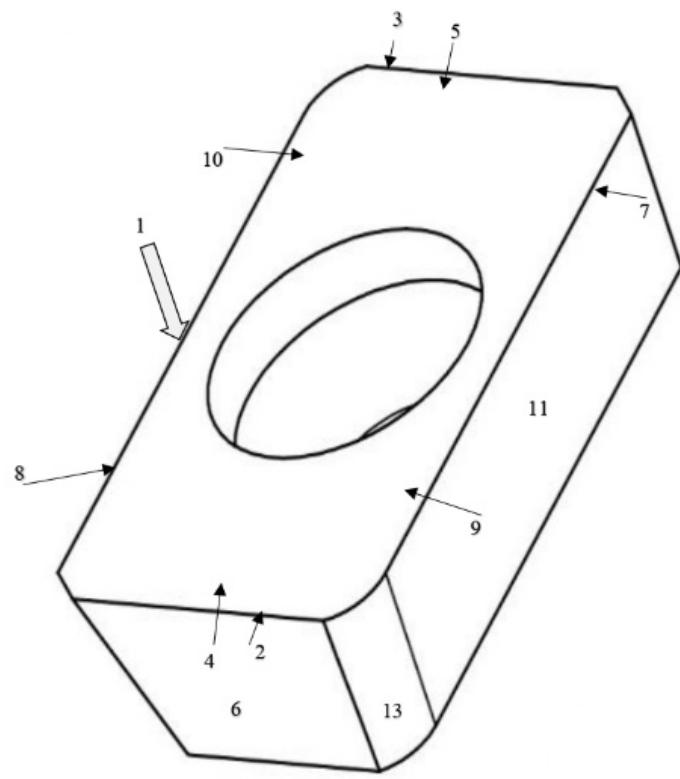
Perspective view of stainless steel 316 grade insert according to invention.
